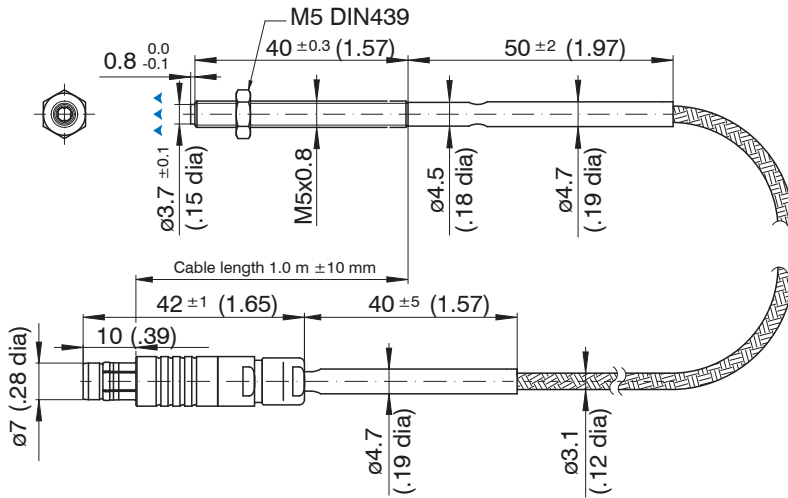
CSE025 sensor featuring integrated cable with thermal protection sleeve
